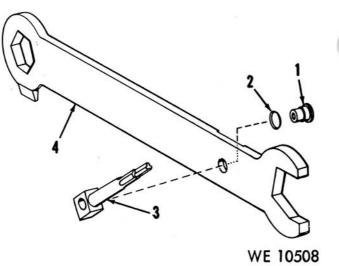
Combination Screwdriver and Reamer Wrench— Exploded View.
